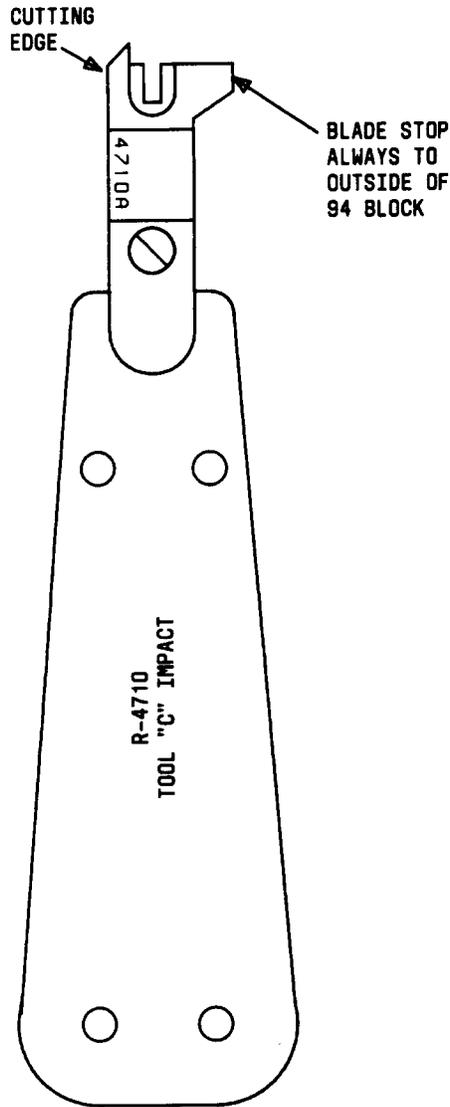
R-4710 "C" Impact Tool With 4710A Blade
